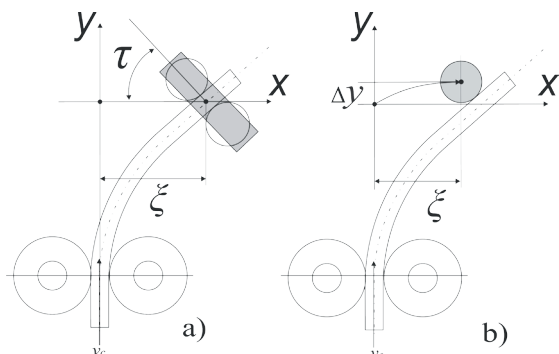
Replacement of 4 roll bending head with a single bending roll
